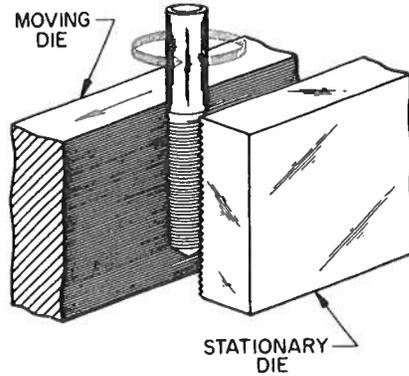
The technique of thread rolling used in cold heading machines.
